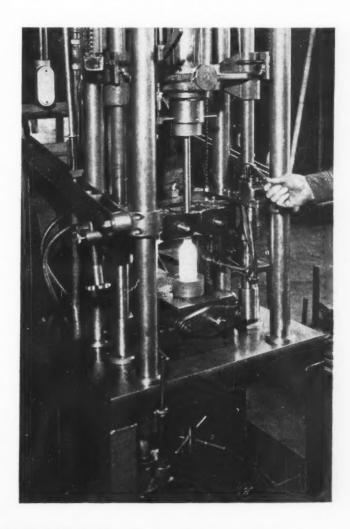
Above—So-called "electricgathering machine" gathers stock into cylindrical or spherical shapes which can be directly upset into finished or semifinished parts
